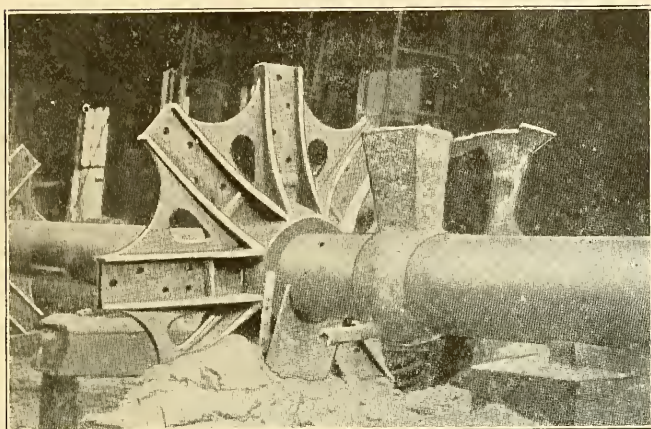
Weld on 10-in. Wheel Shaft of Steamer "Osceola,"
